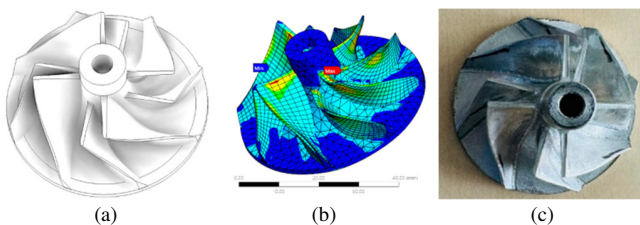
Manufactured compressor wheel used in the experiments: (a) design drawing, (b) strength testing, and (c) machine detail.
